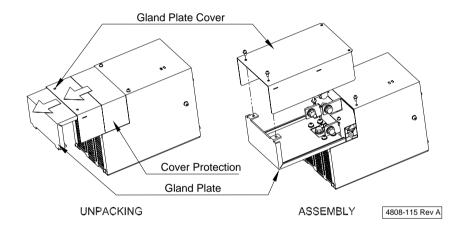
Unpacking from shipping position and assembly of gland plate and cover
